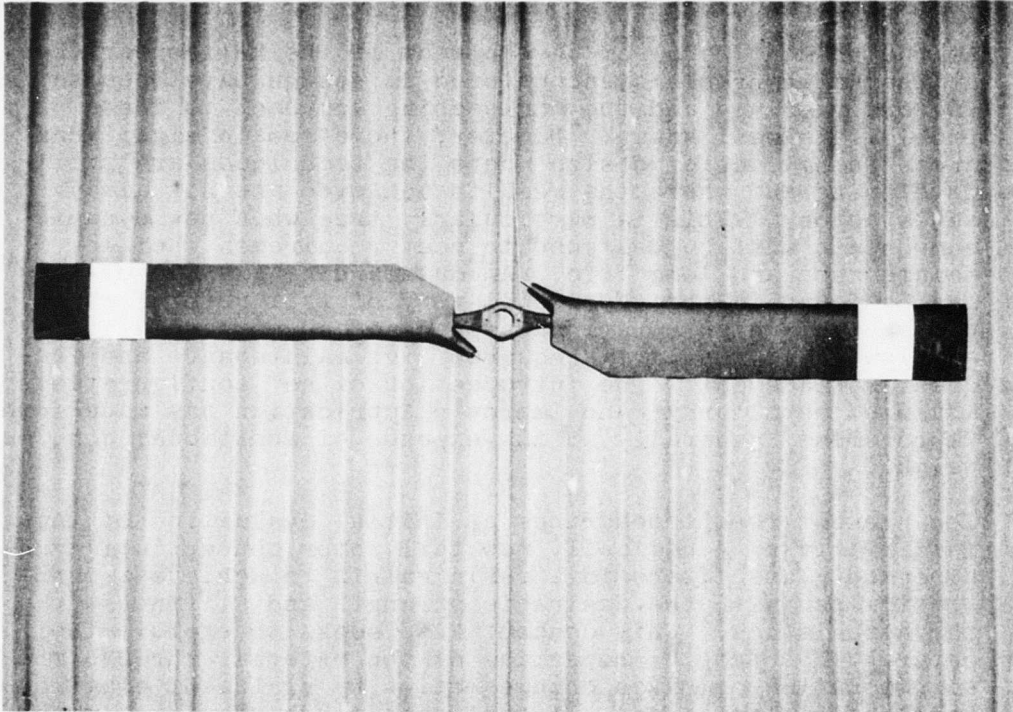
Complete Fiber Glass Tail Rotor Less Mounting Components.
